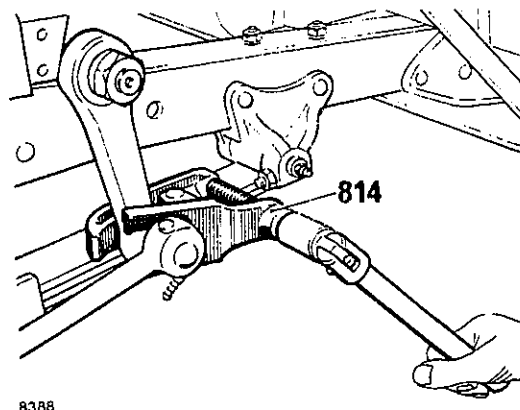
Disconnecting ball joint from drop arm using Remover 814
